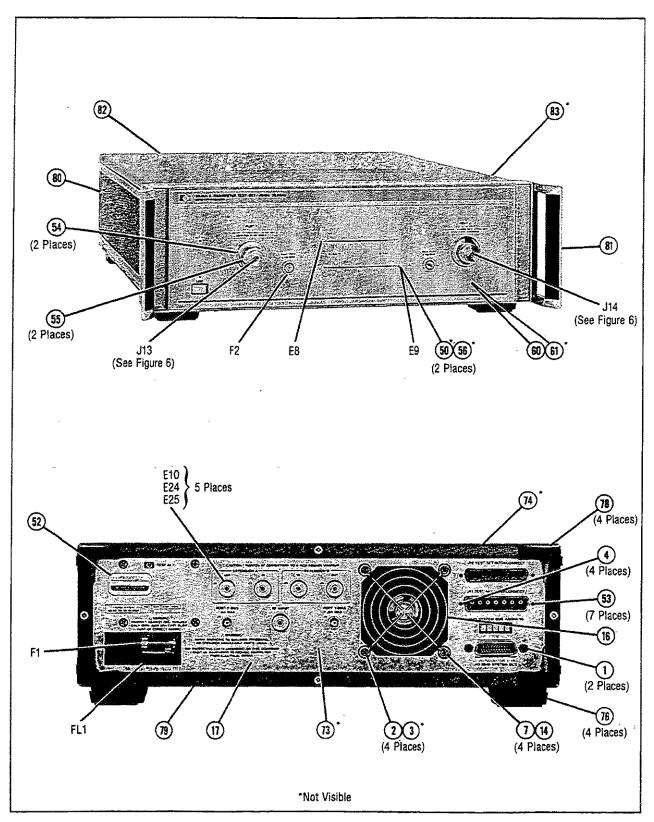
HP 8515A Miscellaneous Mechanical, Chassis, and Electrical Parts (1 of 5)
